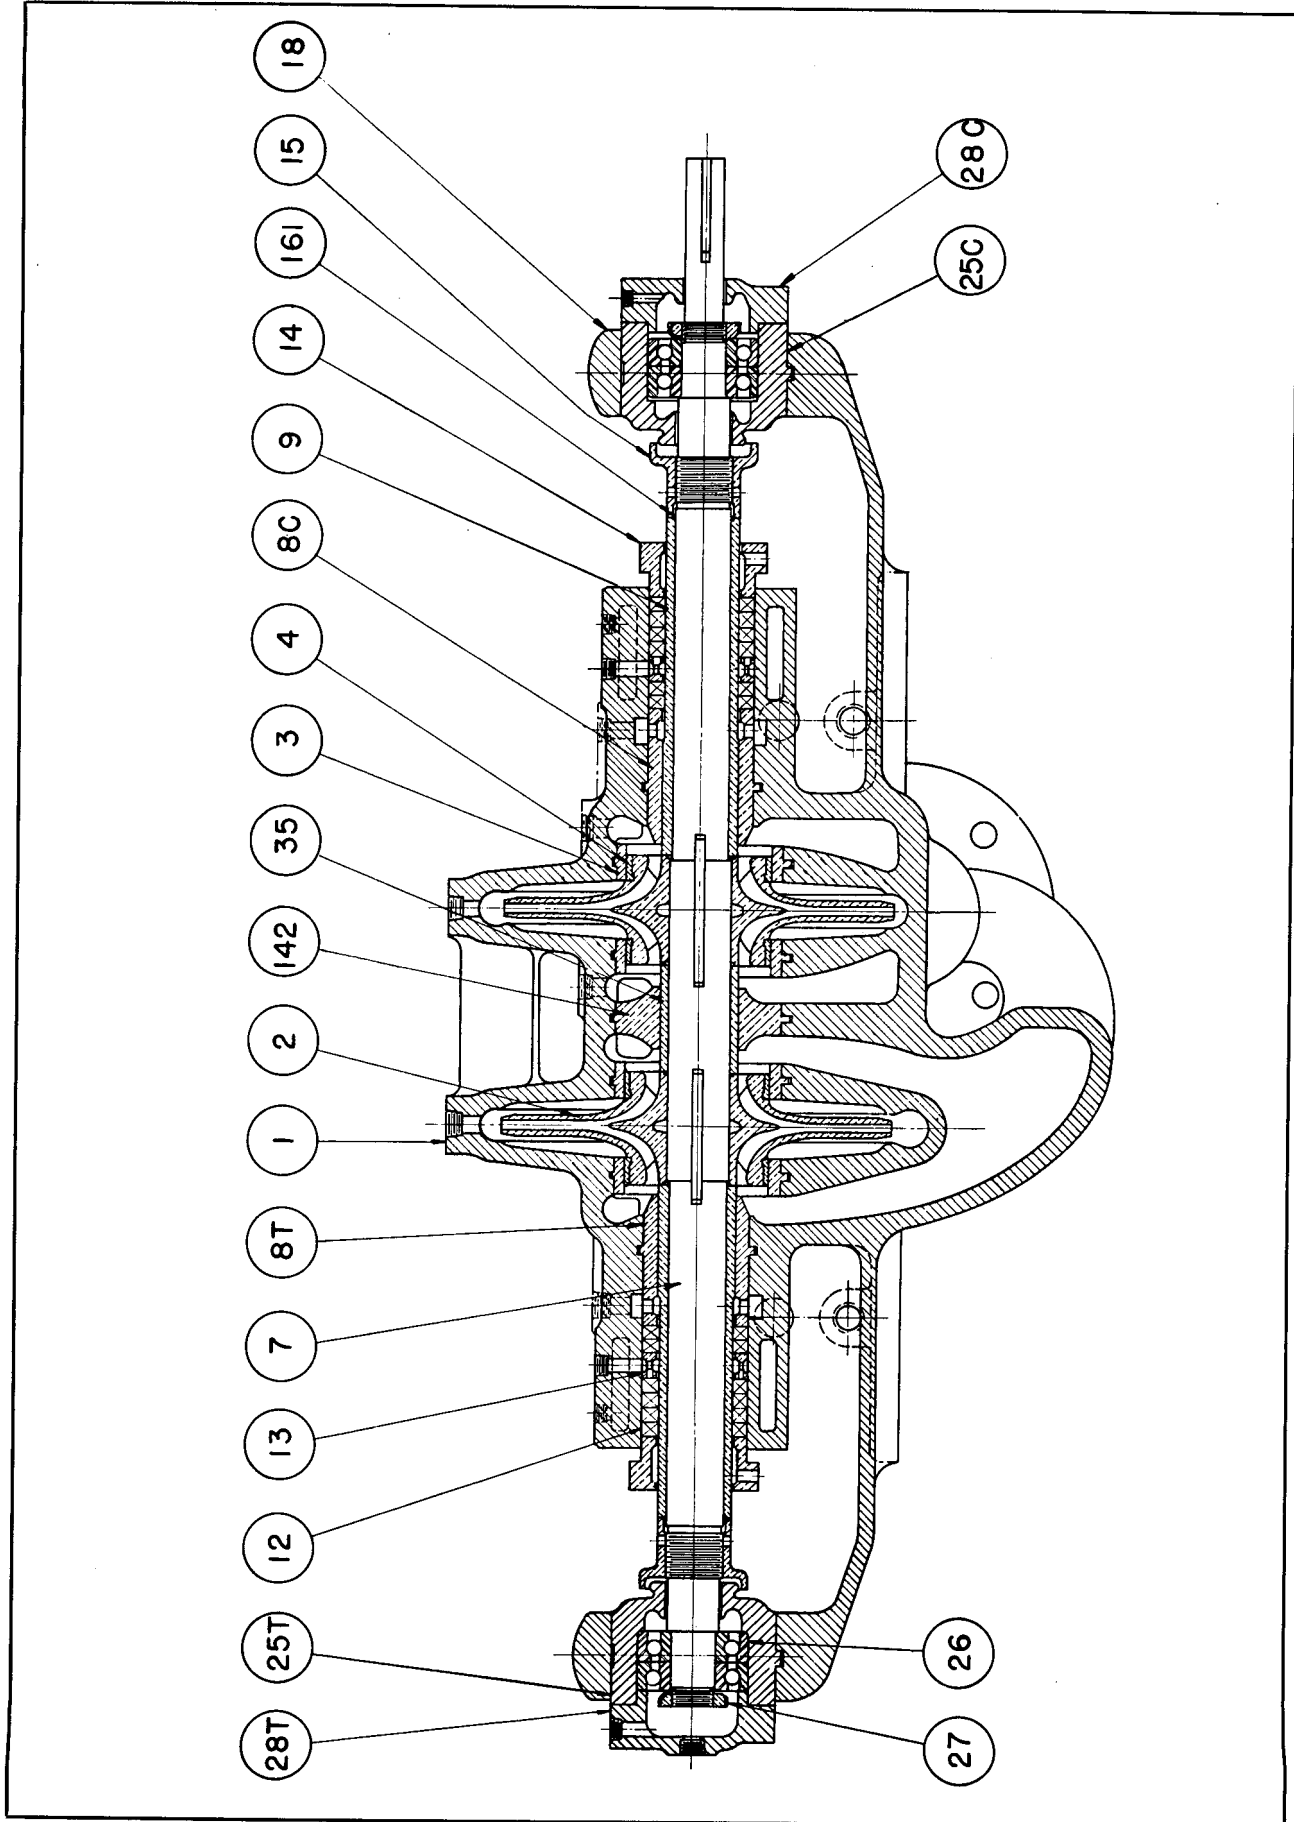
Type M Pump with Grease Lubricated Bearings.
